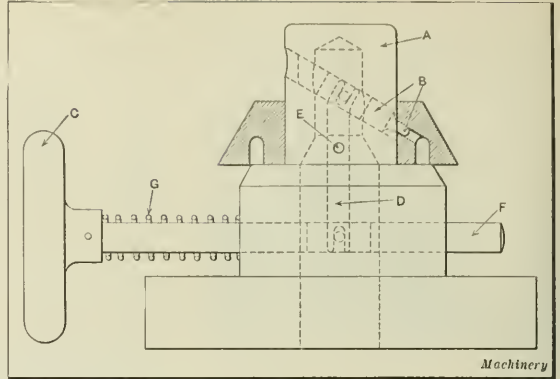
Fixture used on Lighting Line Marking Machine shown in Fig. 14
